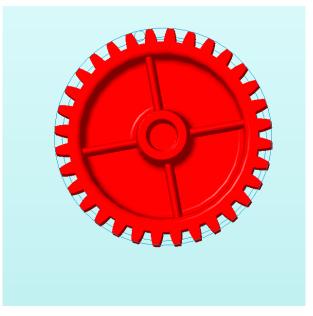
CAD model of the final gear created by the 3D printed mold.
